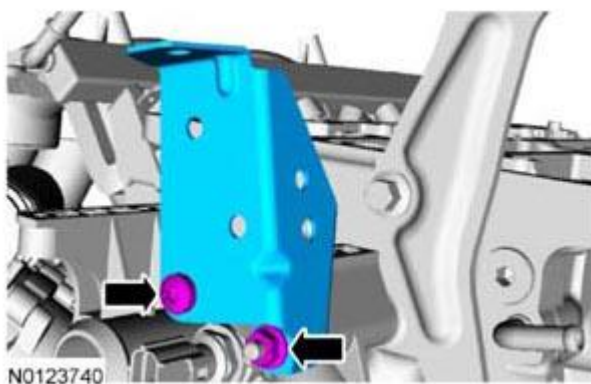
Locating Coolant Outlet Bracket Nut And Bolt
